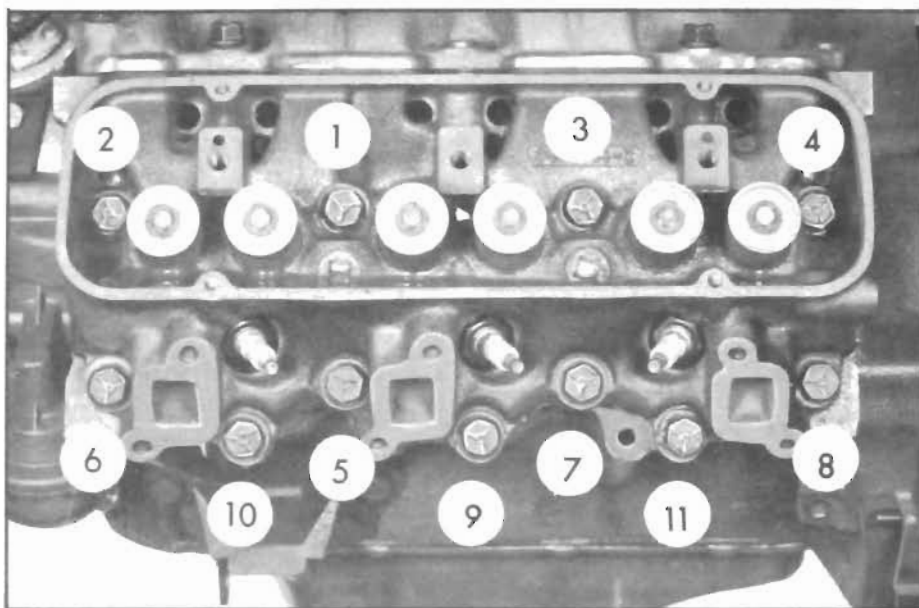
Cylinder Head Bolt Tightening Sequence
